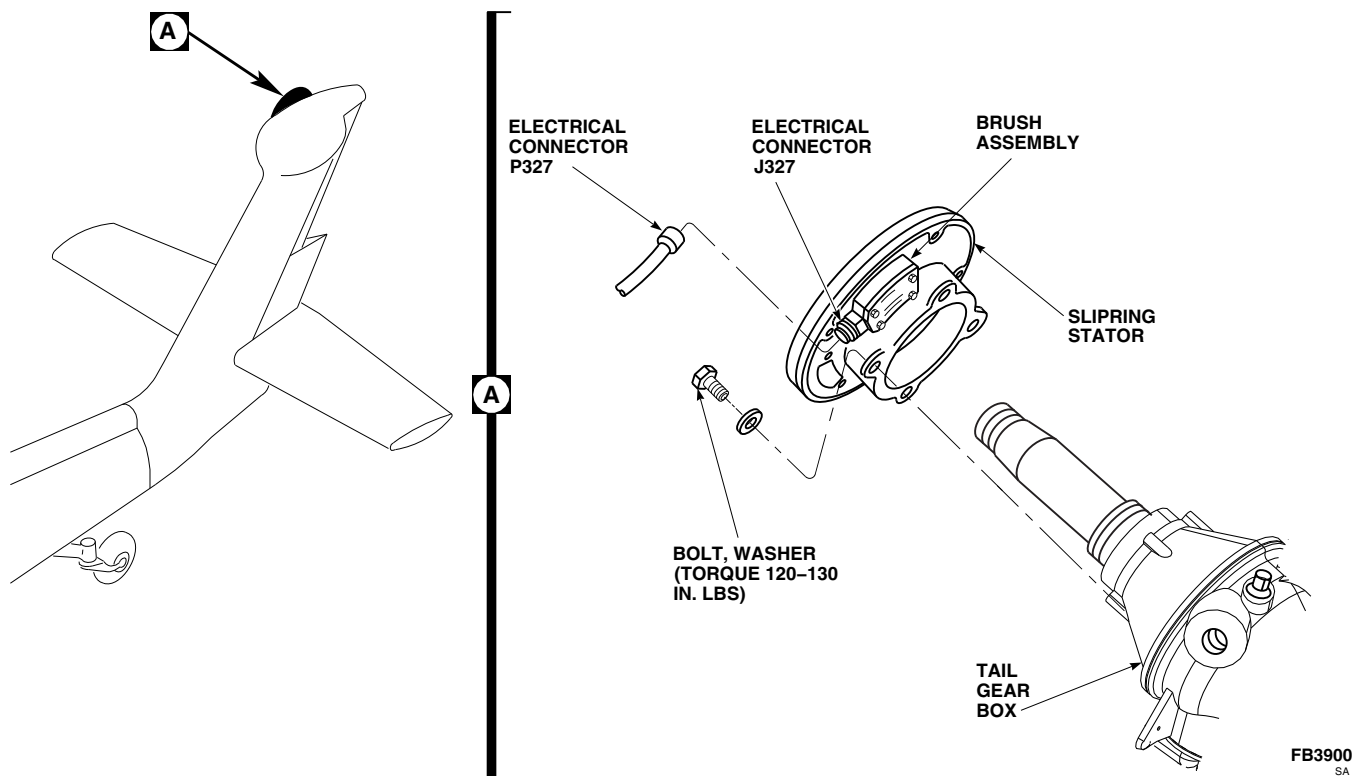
REPLACE TAIL ROTOR BLADE DEICE SLIPRING STATOR
